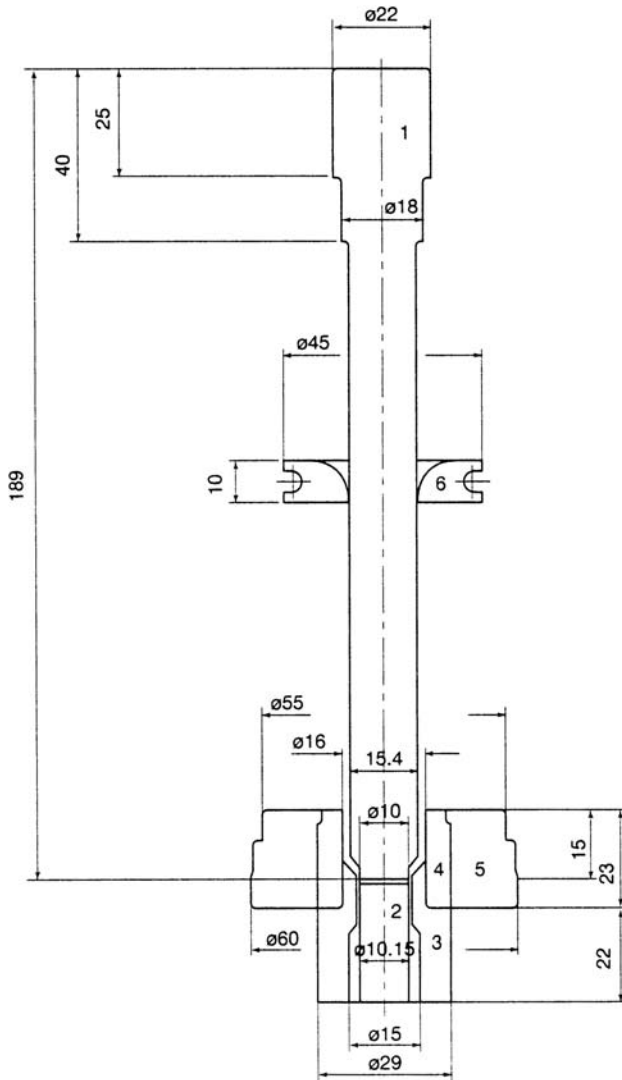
Tool set up for backward extrusion of maker pen housing (Fig. 22), Miyamoto Industry Co. 1. Punch, M2 = SKH51, 62 HRC; 2. Buck-up punch, H13 = SKD61, 53 HRC; 3. Die insert, M2 = SKH51, 58 HRC; 4. Container, Cemented carbide; 5. Shrink ring, H13 = SKD61; 6. Stripper.
